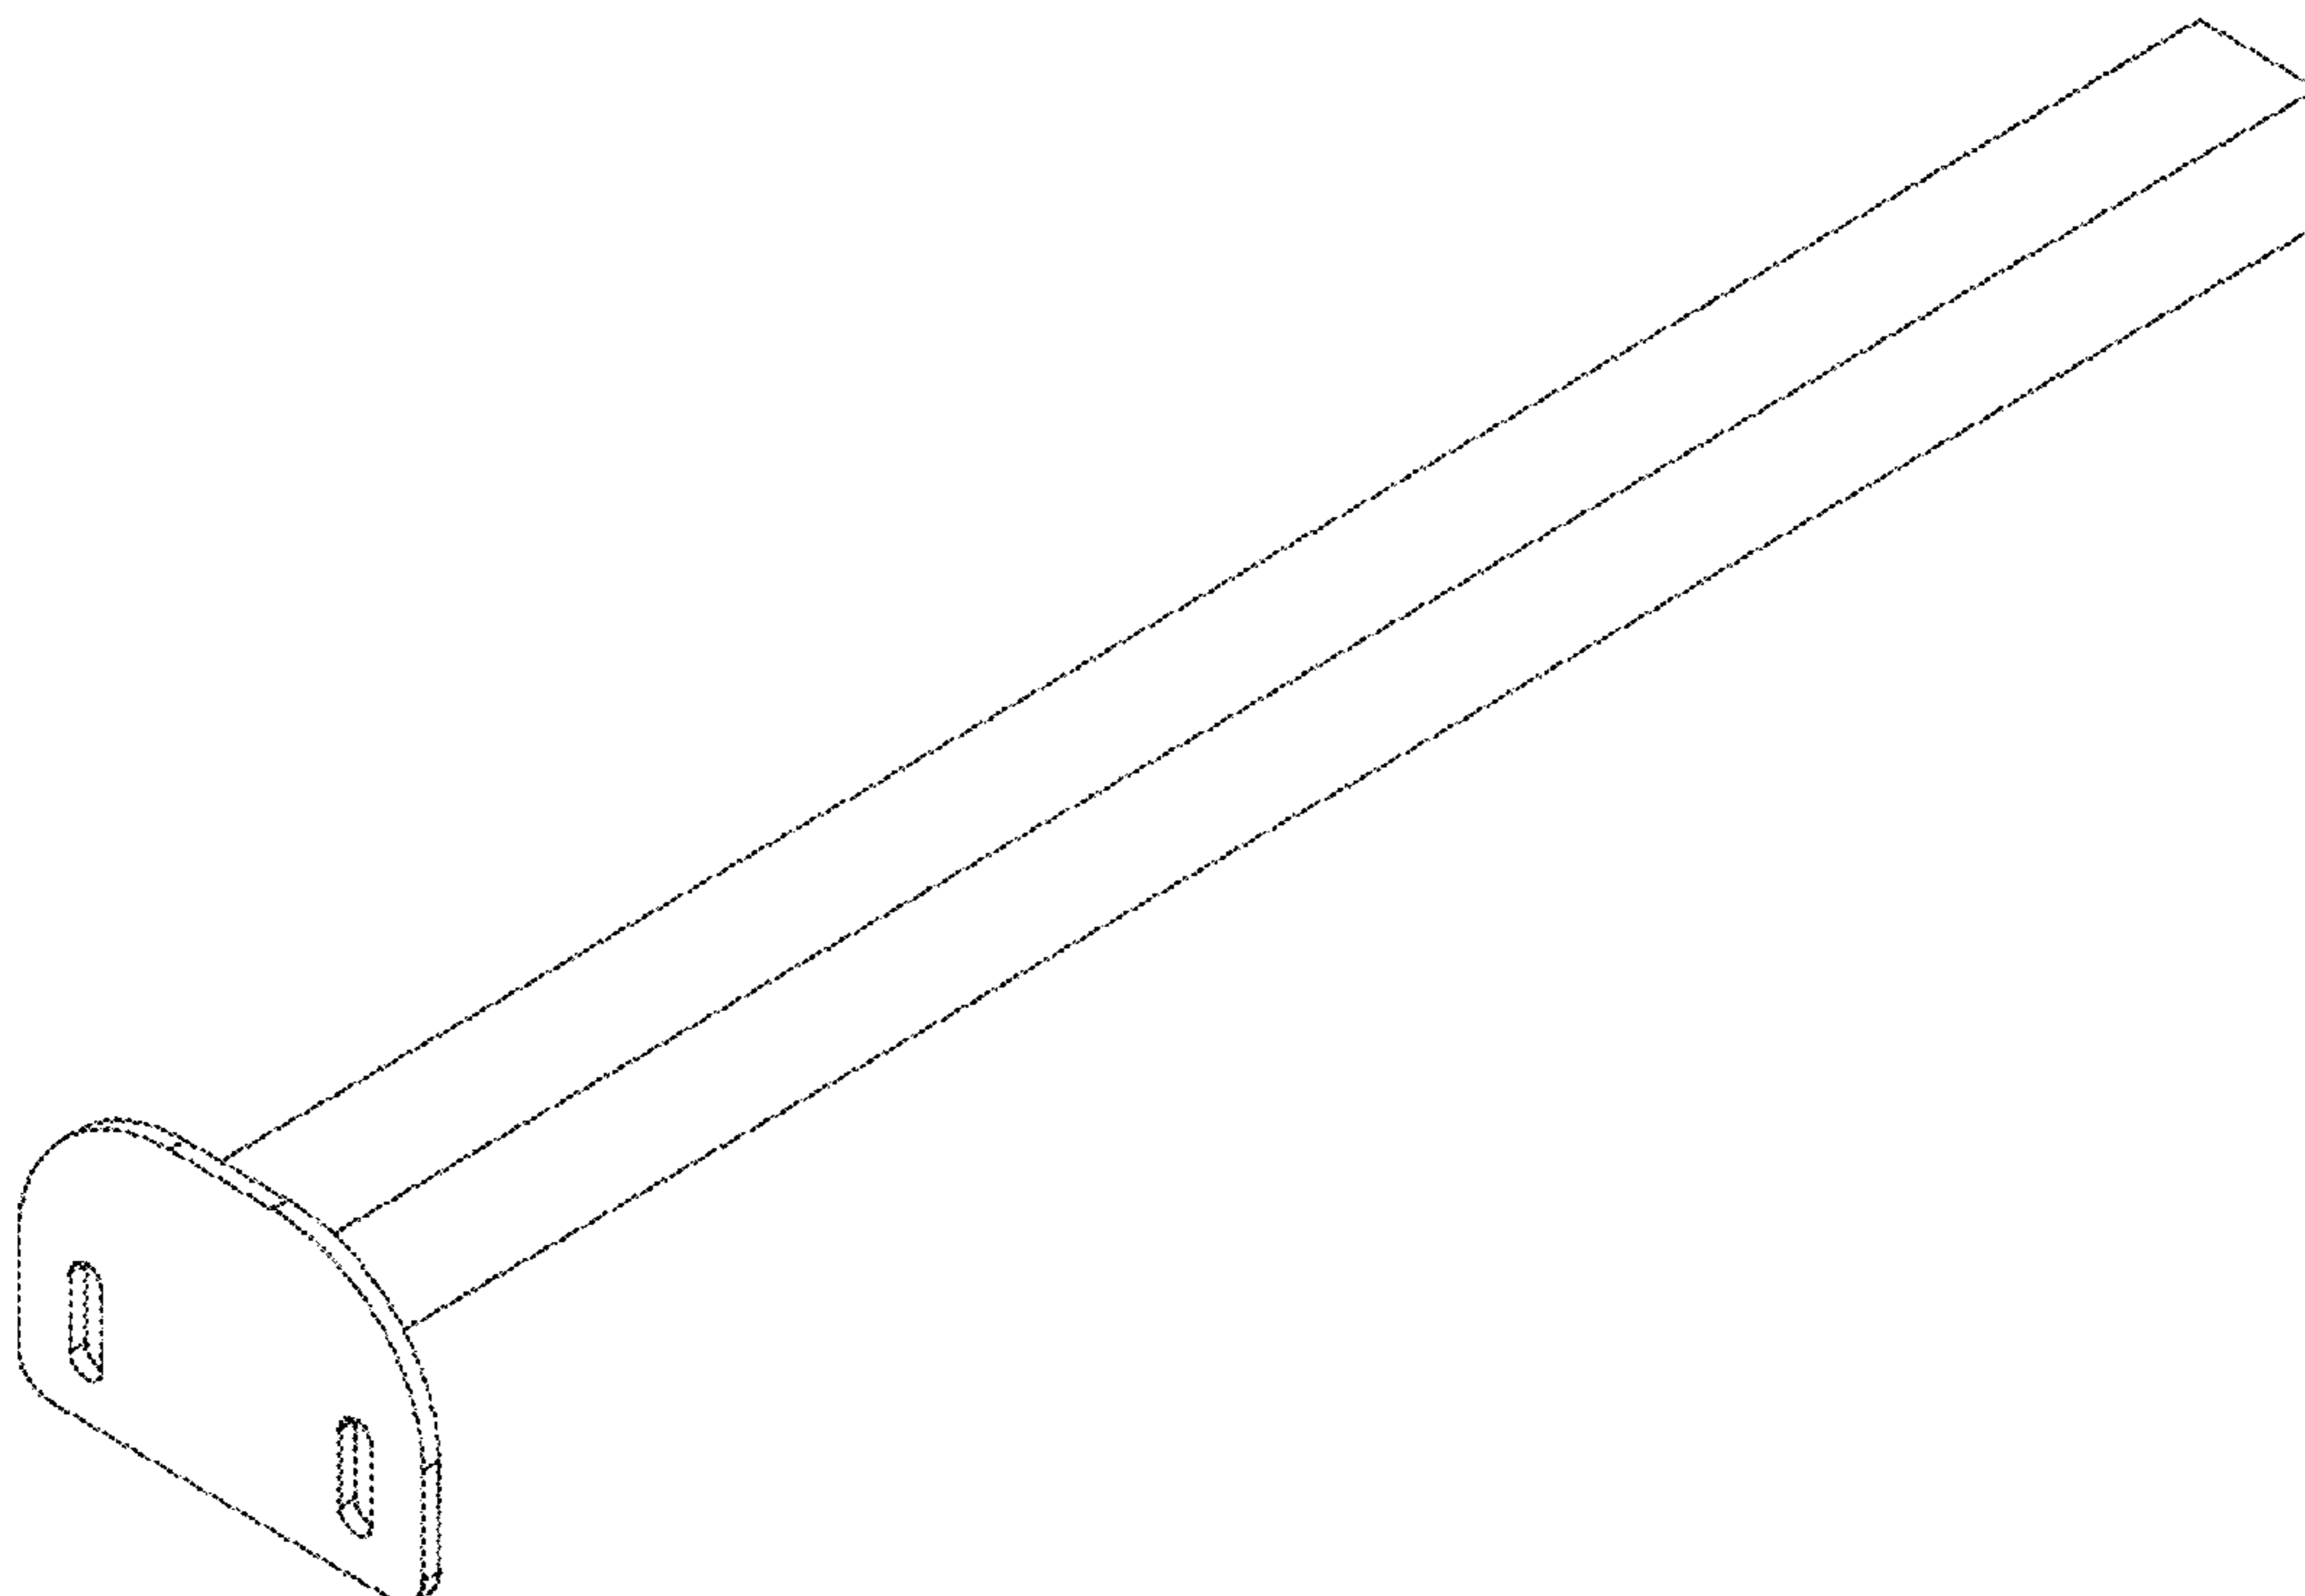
is an elevational front view of the rudder pedal plate support for a gaming chair assembly in FIG. 1;
